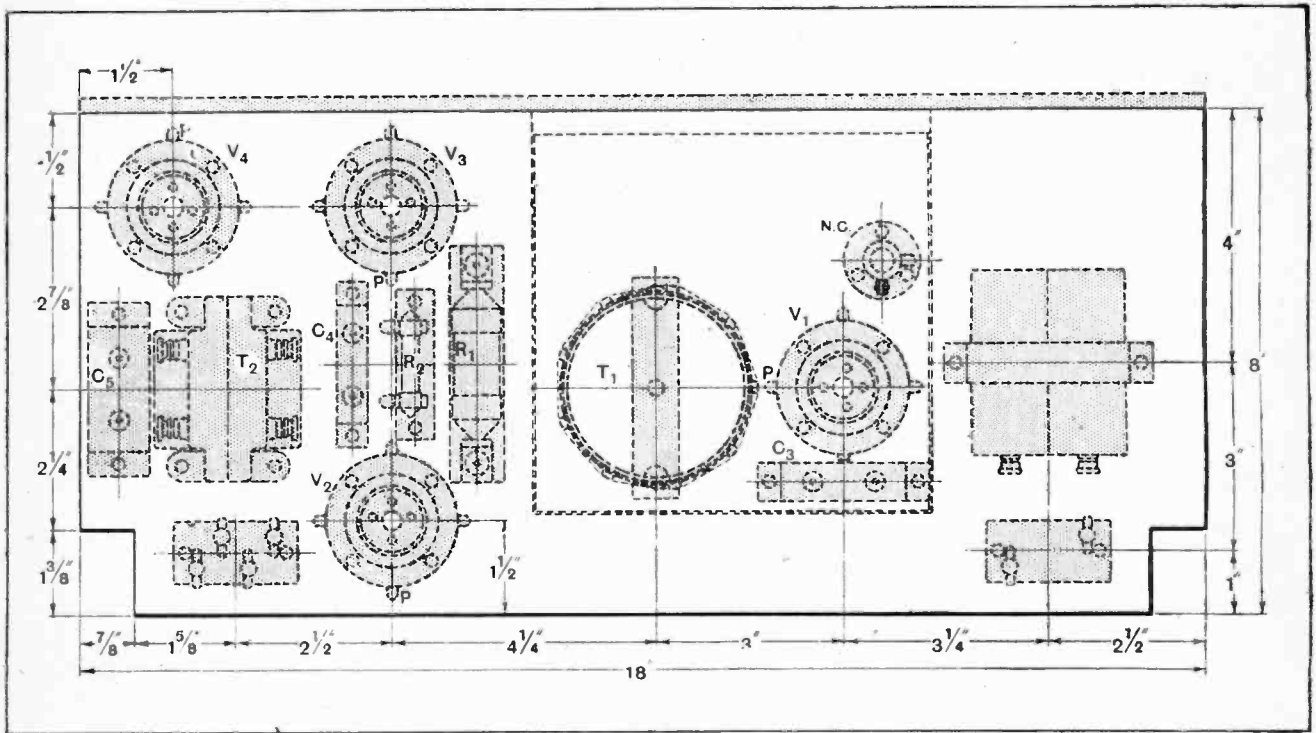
Dimensional drawing for locating the component apparatus on the baseboard.
